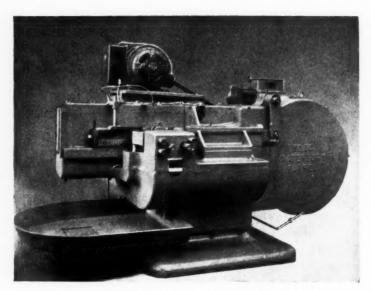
Waterbury Farrel Horizontal Hand-feed Type Thread-rolling Machine
